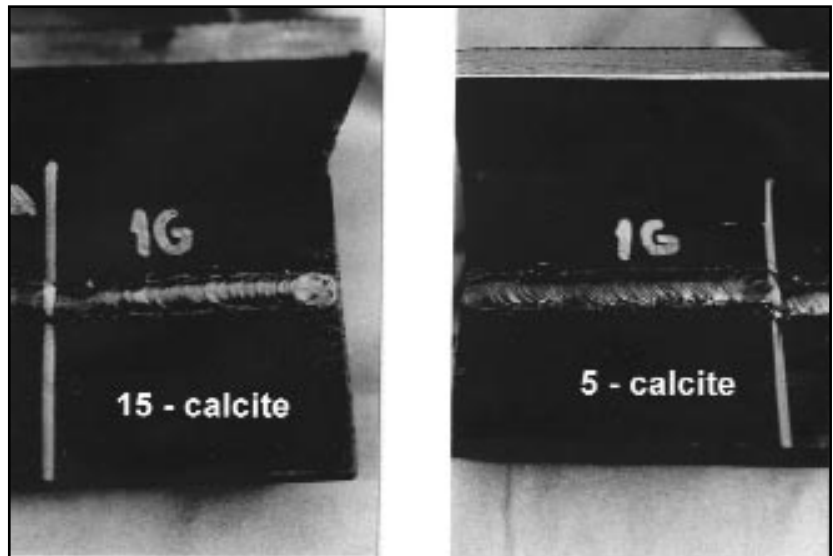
Beads obtained in the flat position welding with AC.
